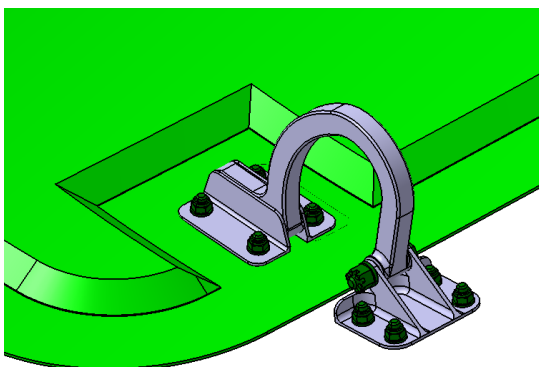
(A) Bolted joint of a hinge to door/cover honeycomb
